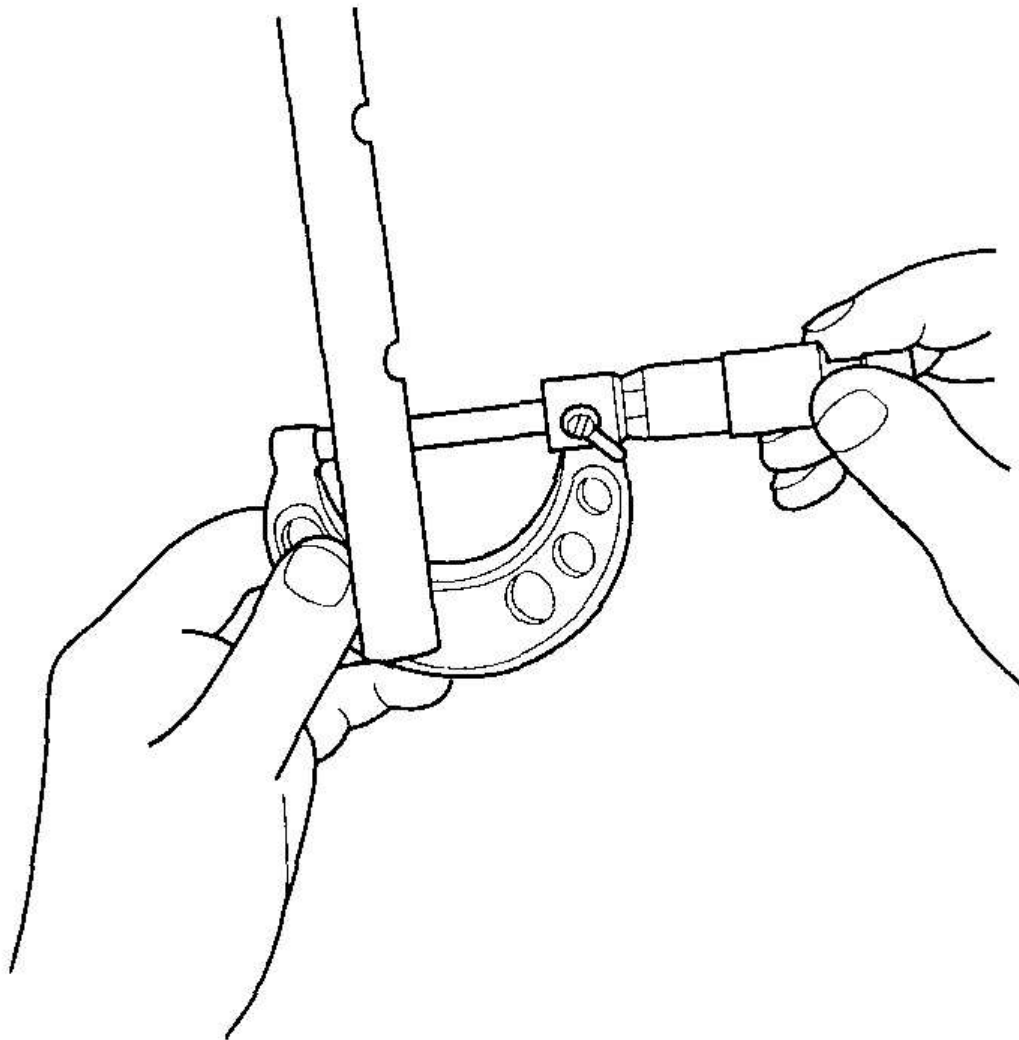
Disassembly/Reassembly Of Rocker Arm And Shaft
